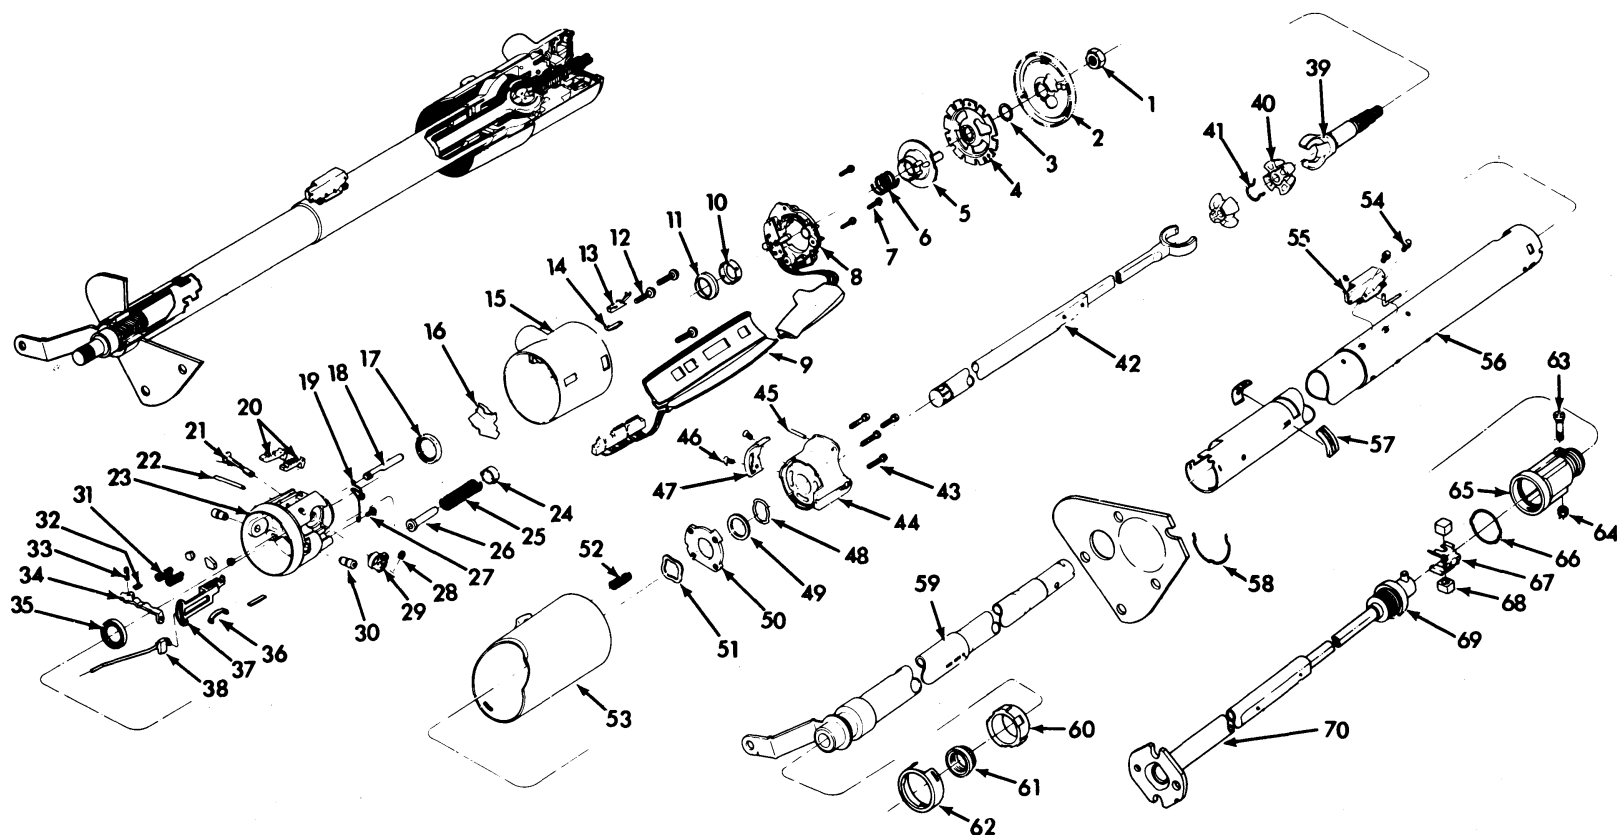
B-89--Tilt Steering Column Assembly (Typical)
